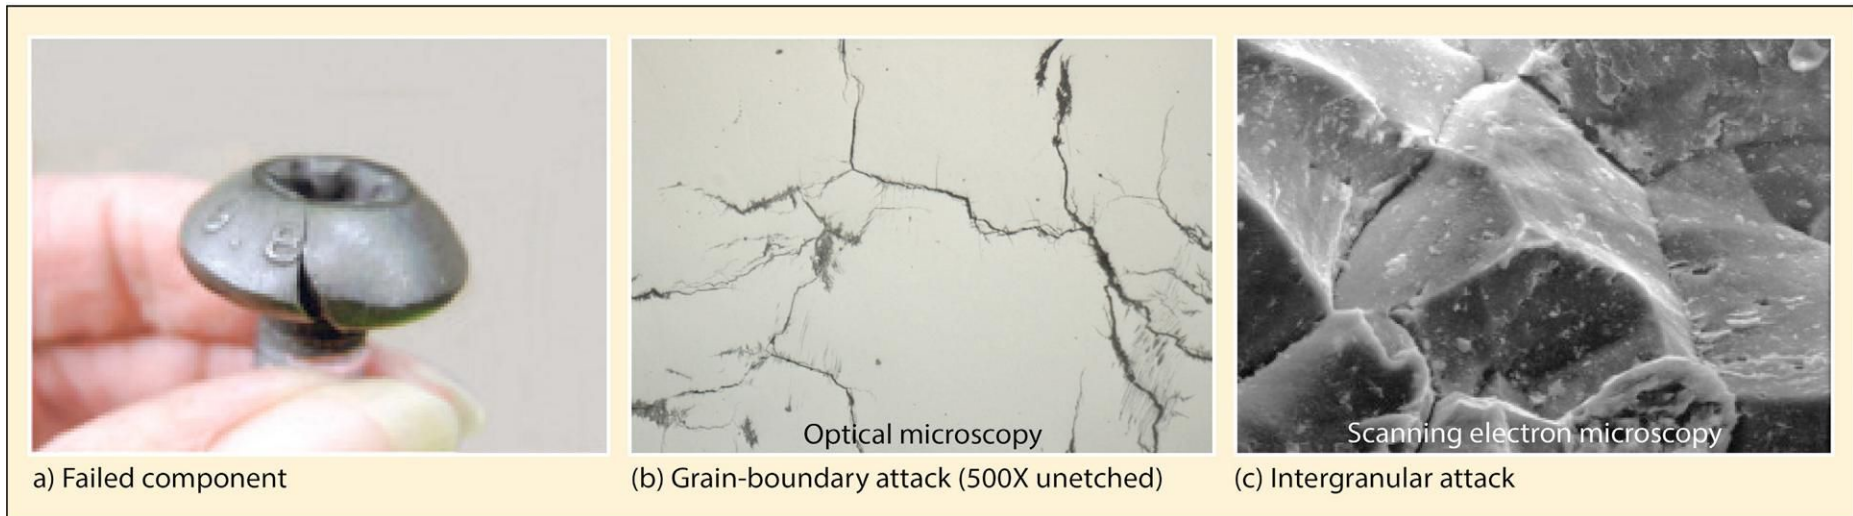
Fastener failure – Stress corrosion cracking[2]
